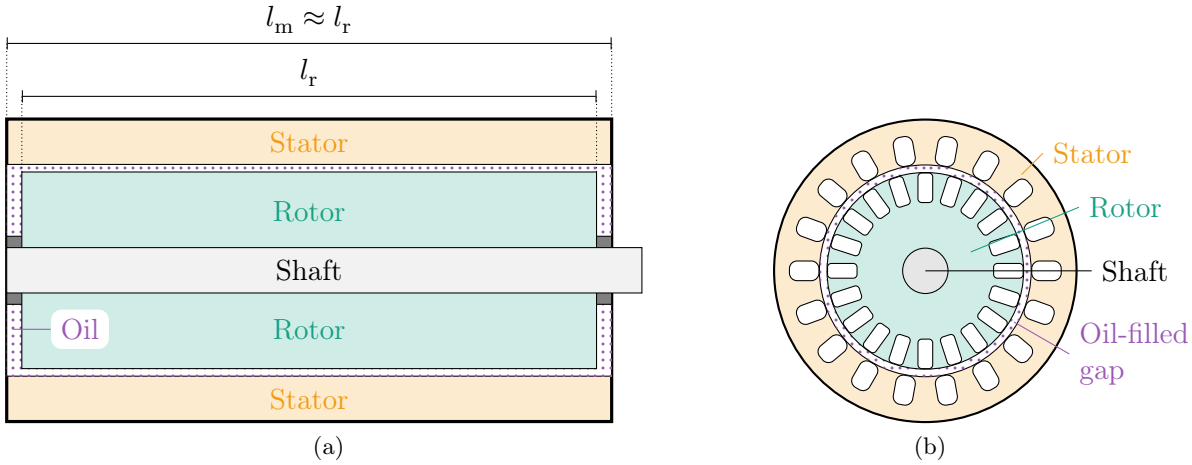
Cross-section views of the single-rotor/single stator (SR/SS) ESP motor: (a) side view and (b) front view.
